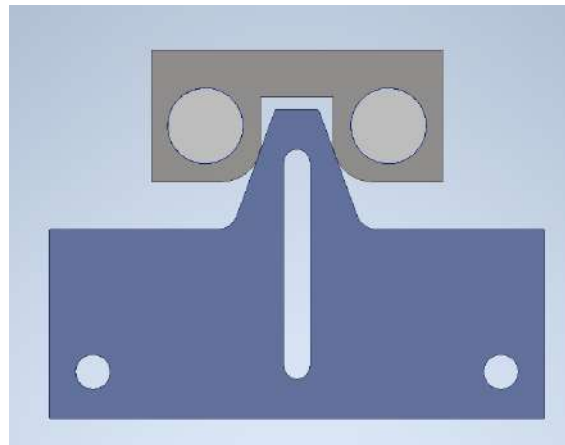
First iteration of the heater and hybrid gear tooth assembly
